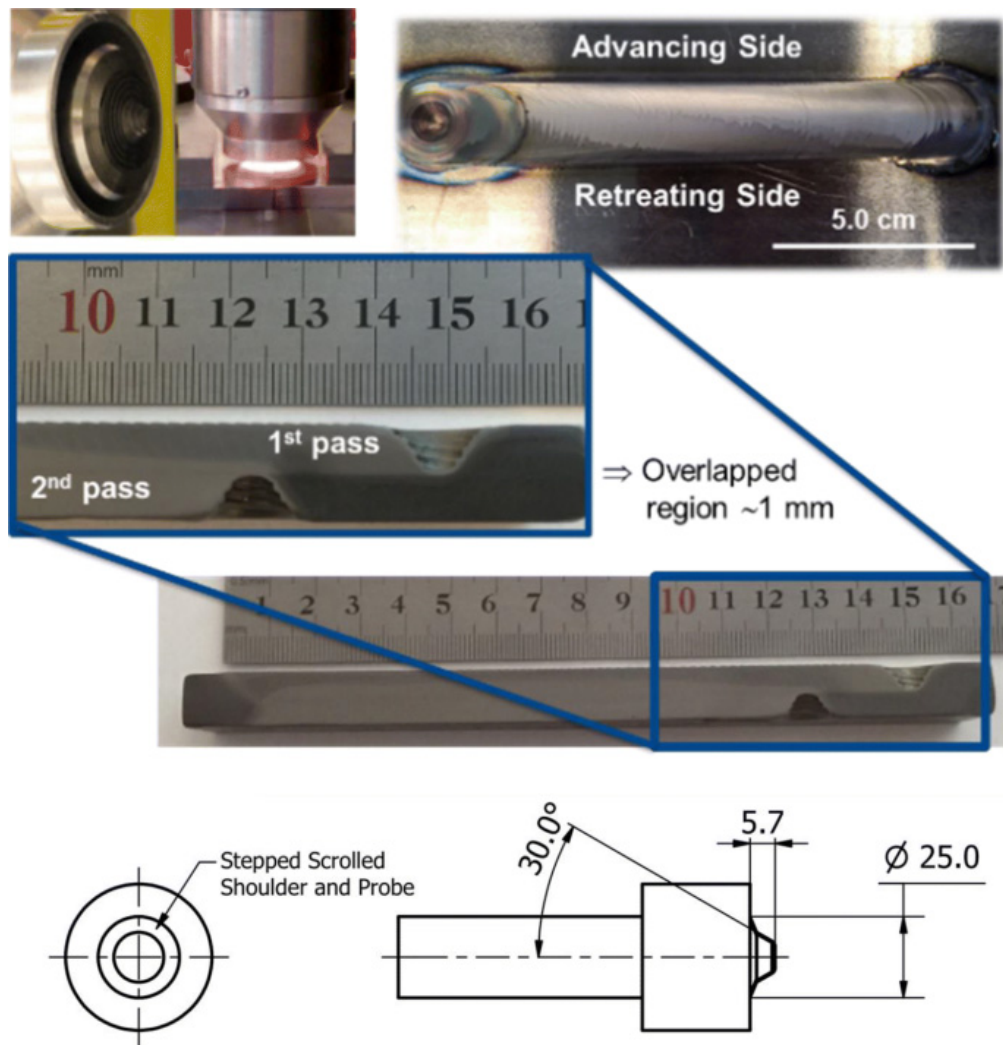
Technical specifications and operational overview of the FSW process: (Top-left) Stepped scrolled shoulder tool and the welding process in progress; (Top-right) Morphology of the weld bead upper surface showing the Advancing and Retreating sides; (Center) Longitudinal macrograph illustrating the overlap region between the first and second passes; (Bottom) Engineering drawing of the tool geometry with a 30.0° cone angle and 5.7 mm probe length. Reproduced from [82].
